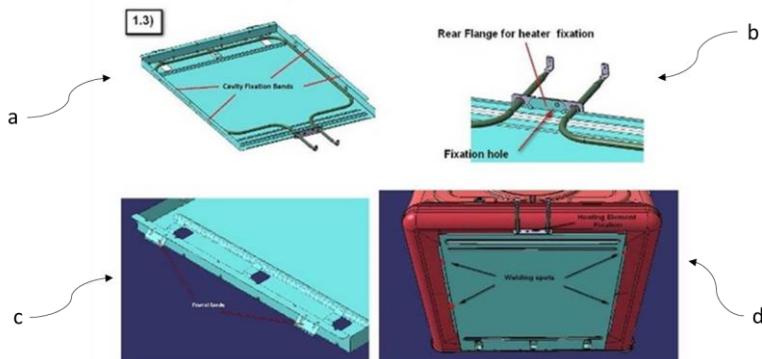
A perspective view showing, for the heating support; (a) cavity fixation bends; (b) a rear flange for heater fixation and a fixation hole; (c) lateral bends; (d) an installation with a heating element fixation and welding spots.
